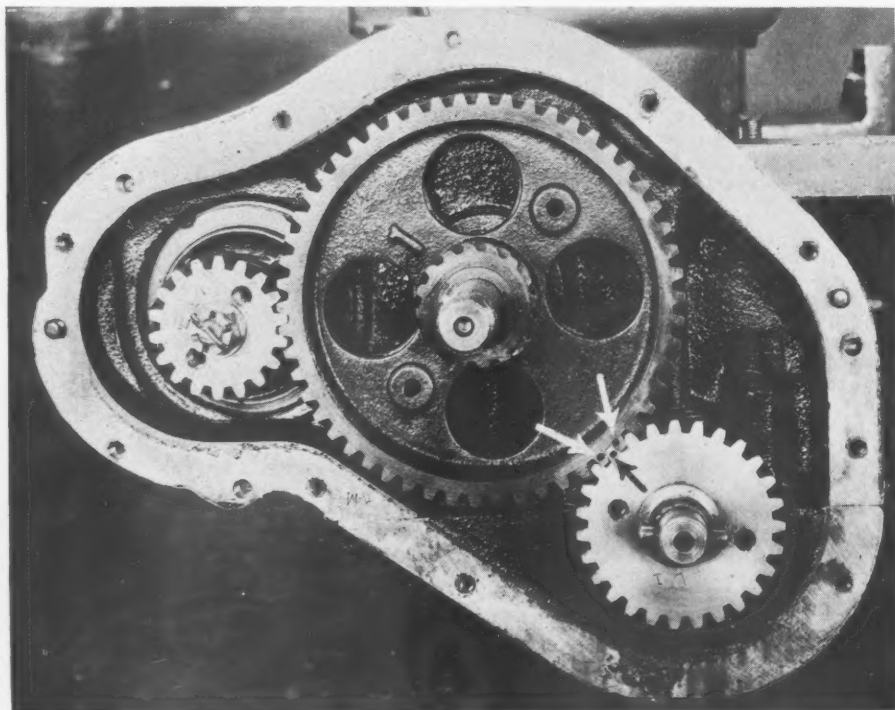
Timing and Generator Gears Exposed and Showing Punch Marks on Camshaft and Crankshaft Gears, Facilitating Timing
